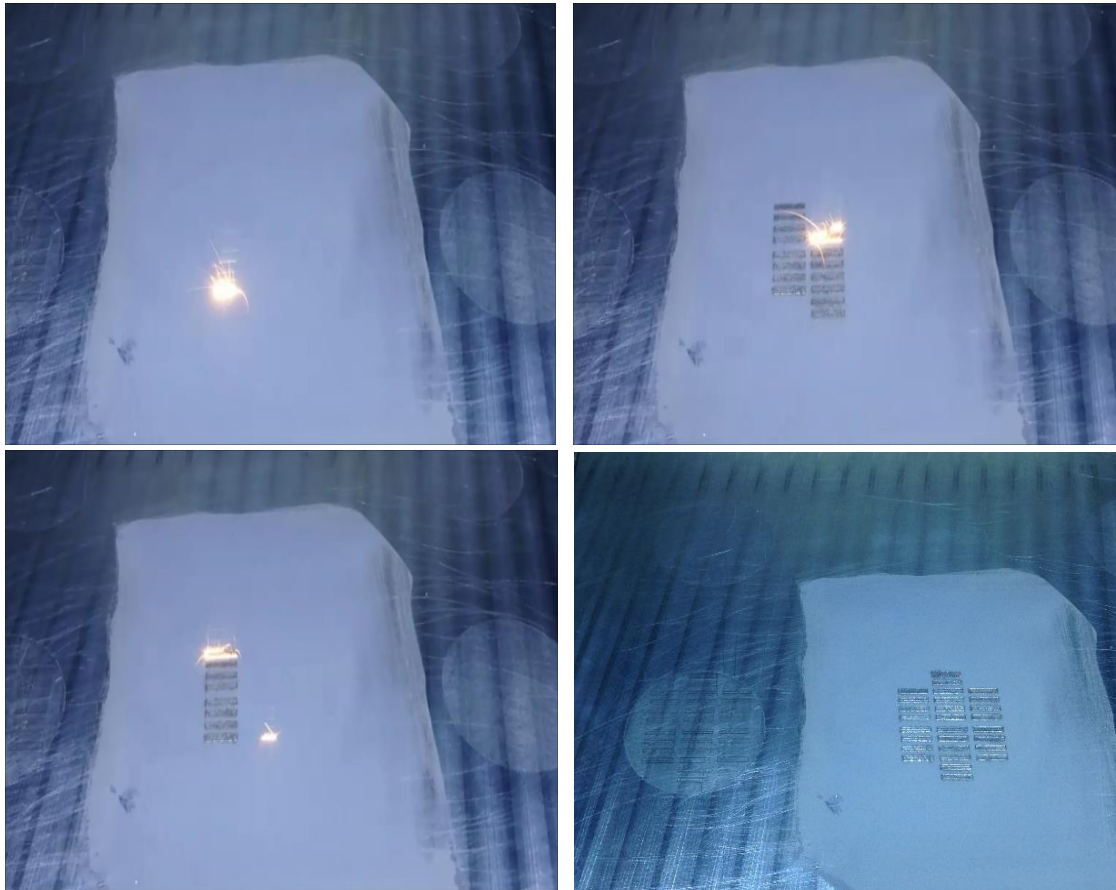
Image of inside working chamber of SLM machine during and after processing a set of samples
